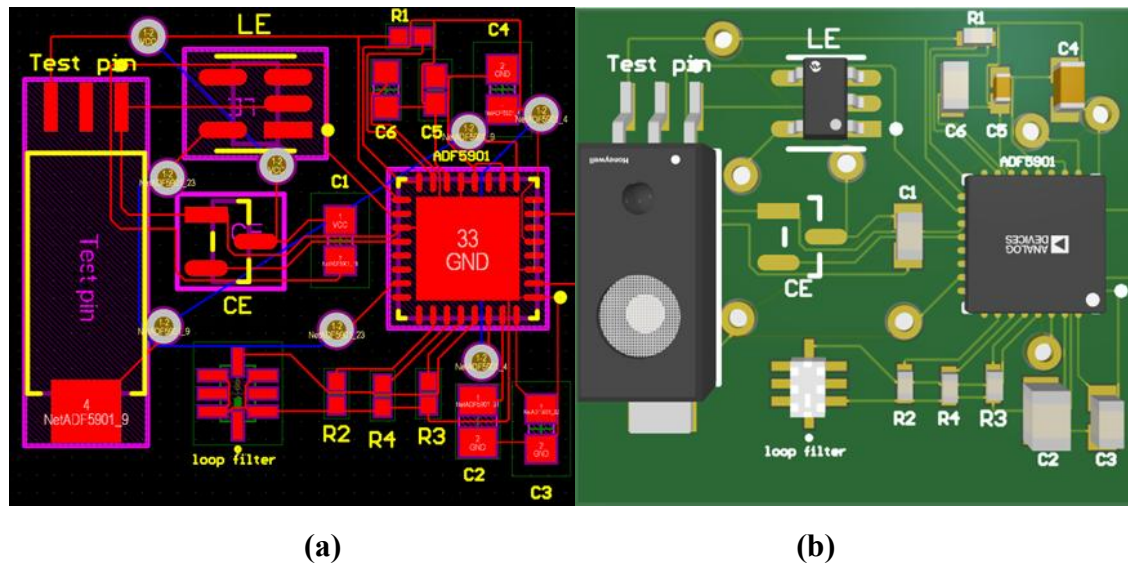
The printed circuit board is designed by an Altium designer in (a) 2D (b) 3D layout mode.
